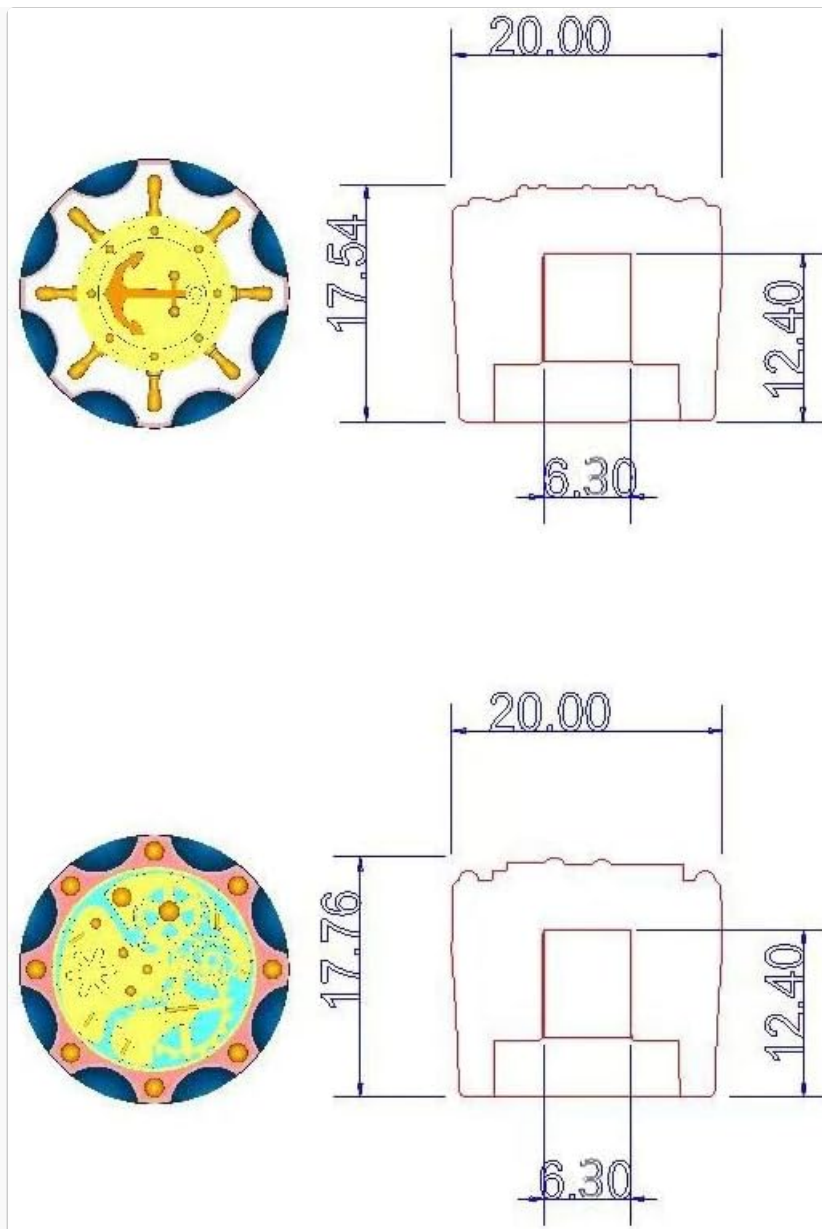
Technical drawing illustrating the precise dimensions of the control knob.
